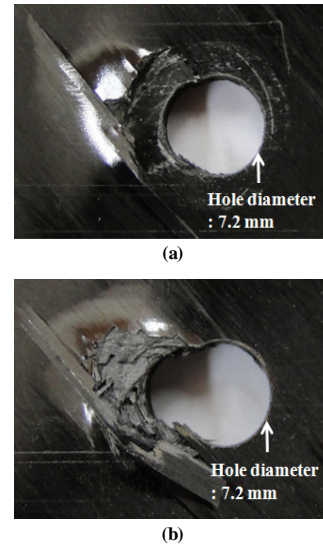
Fractured composite joint ; (a) Bolted joint (b) Pinned joint.
